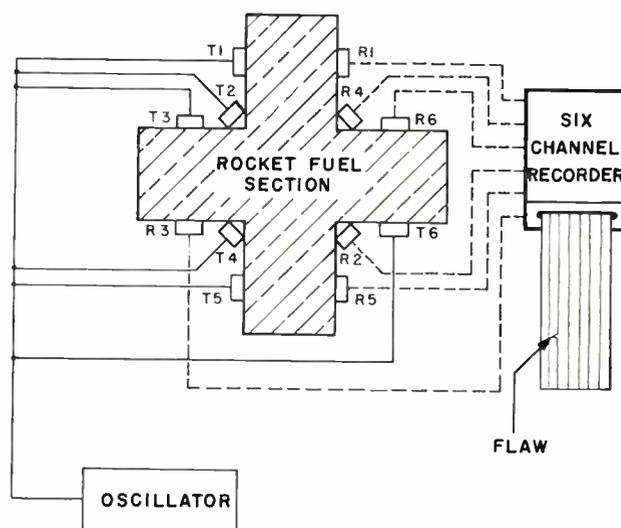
Schematic sketch showing automatic ultrasonic inspection for hidden flaws in solid rocket fuel.
